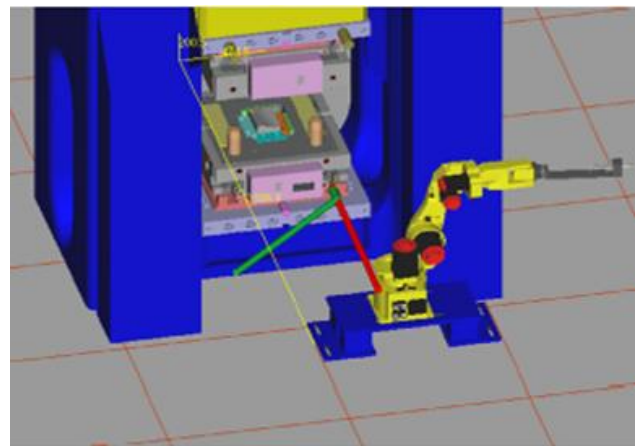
Design of Special Intelligent Manufacturing Robot Tool- Layout checking
